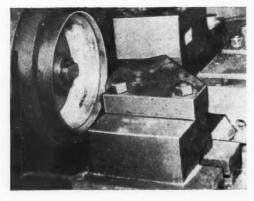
A typical stainless steel operation at the Farm Implements Division of International Harvester is turning the counterbore in bowl shells made from No. 410 stainless. Use of Carboloy tools made it possible to step speed up from the 300 s.f.p.m. formerly used to 1200 s.f.p.m.
